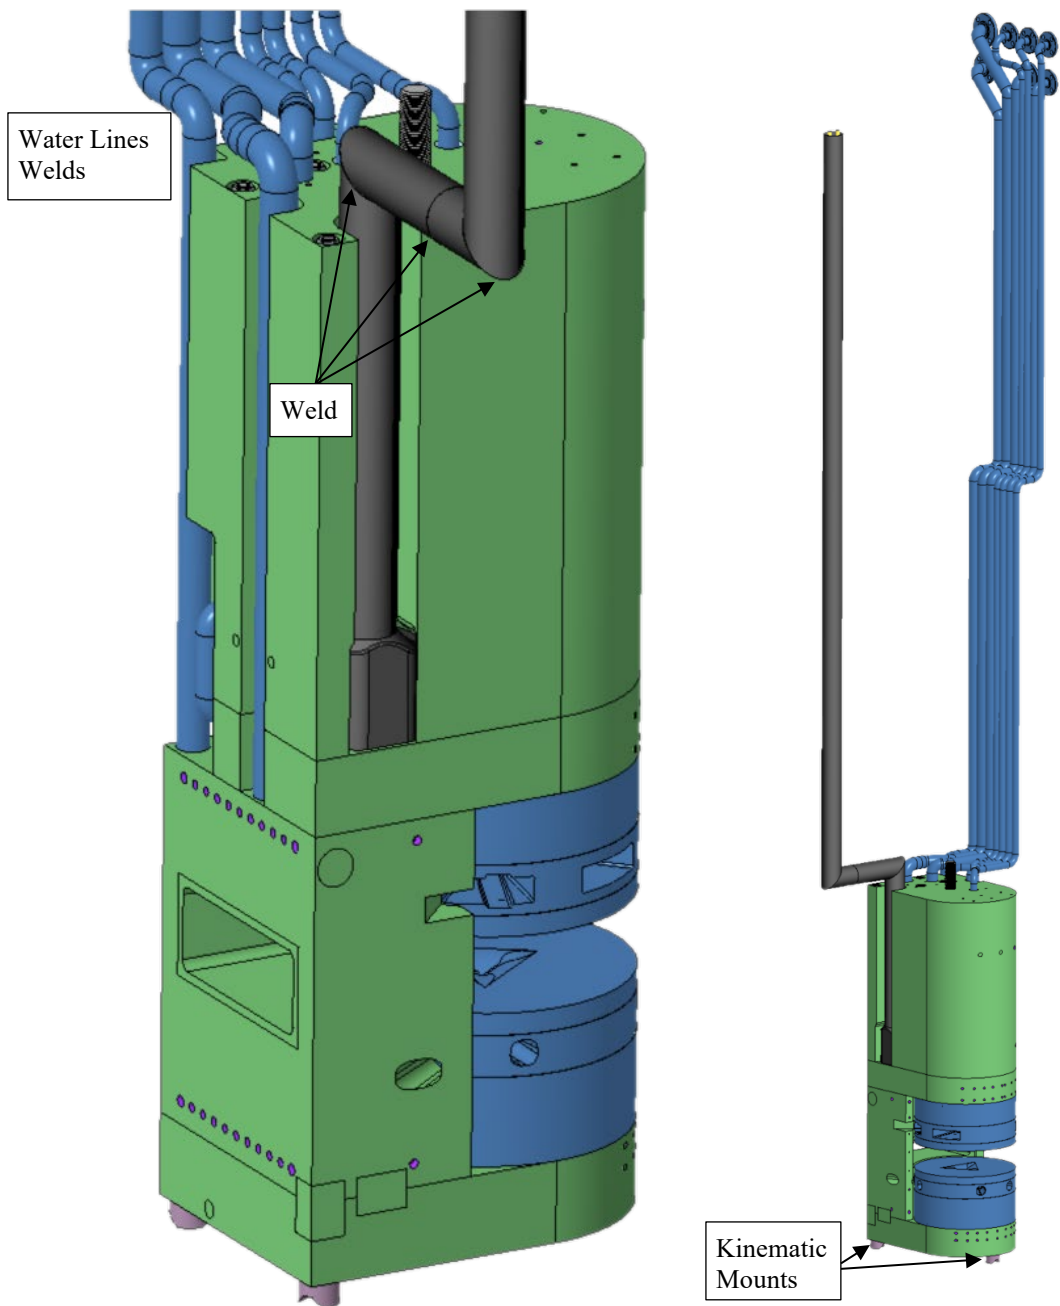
Piping welds above the shield block and overall MRA view.
